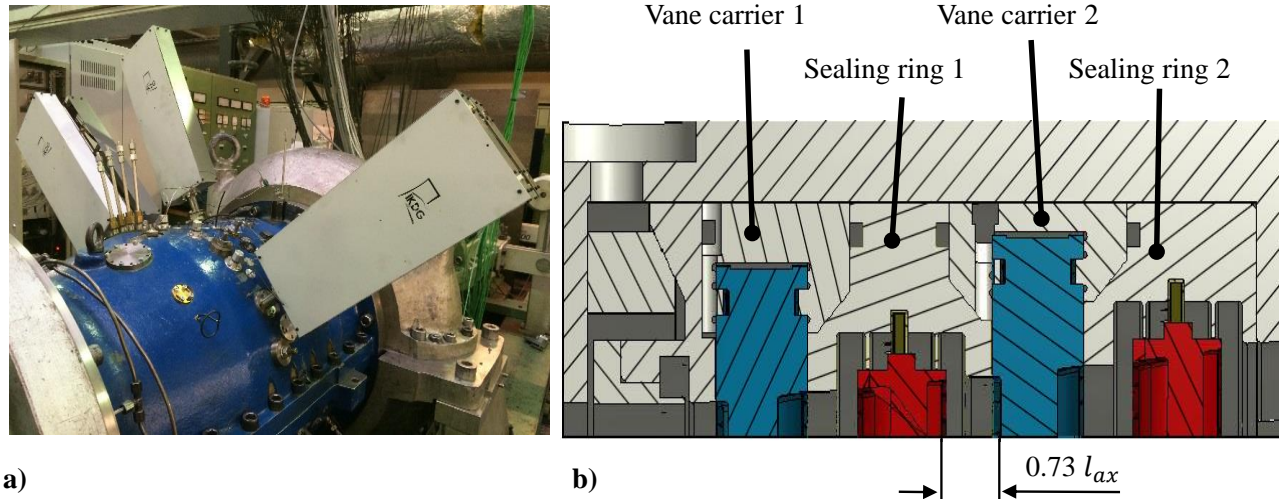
a) Test turbine equipped with probe adjusting devices b) Detailed view of the constructive assembly of vane carriers and sealing rings in example for the BS configuration
